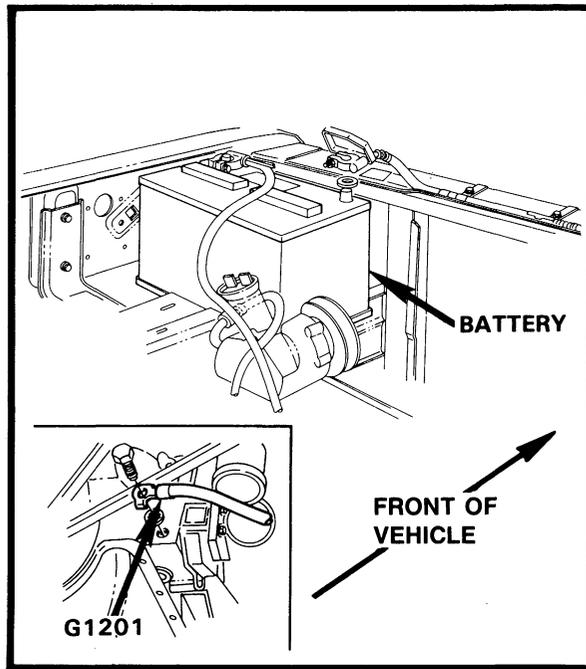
Battery Wiring LH Side (Diesel Engine)
